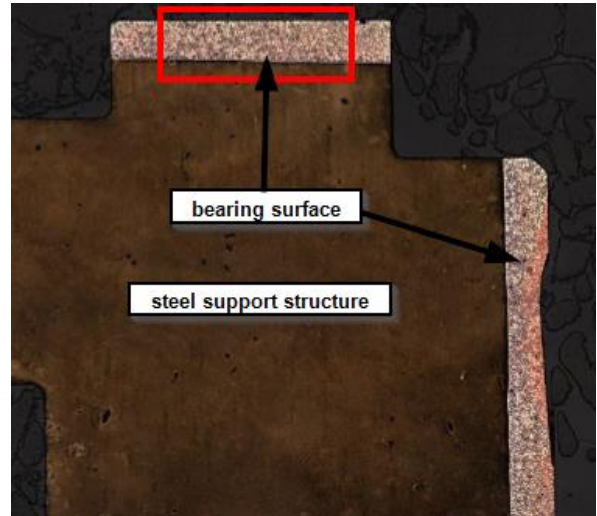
section view of a bearing sample after methanol corrosion test
